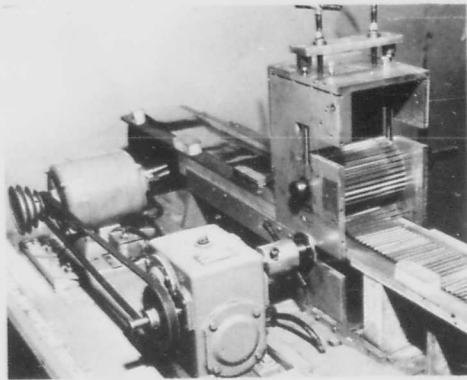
Corrugation Tool for Fabricating Honeycomb Core
